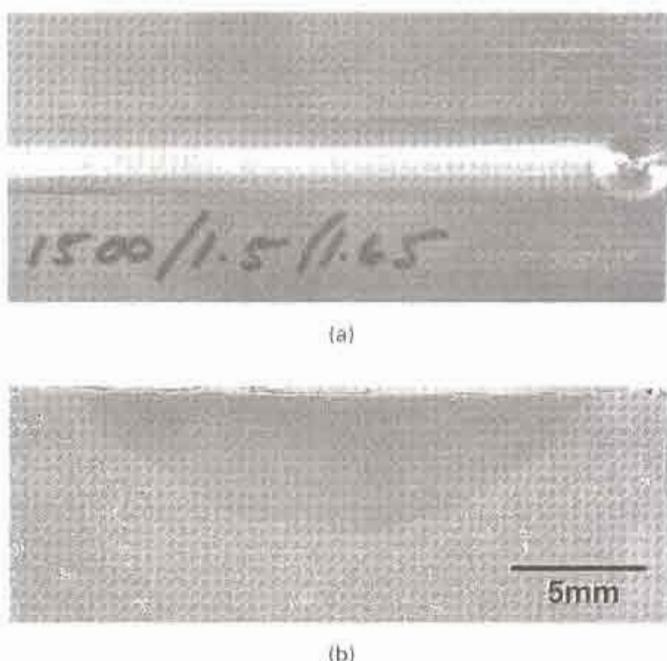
(a) Top surface of a friction-stir weld joining 1.5-mm- and 1.65-mm-thick aluminum sheets with 1500-rpm pin rotation. The welding tool has traversed left-to-right and has retracted at the right of the photo. (b) Metallurgical cross section through an alloy 356 aluminum casting that has been modified by friction-stir processing.
